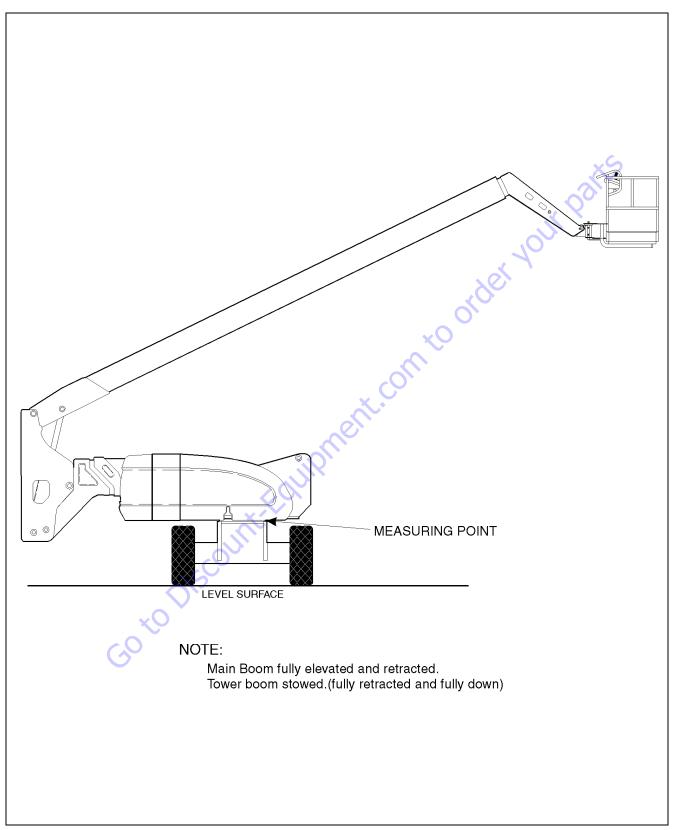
Swing Bearing Tolerance Boom Placement (Sheet 1 of 2)
